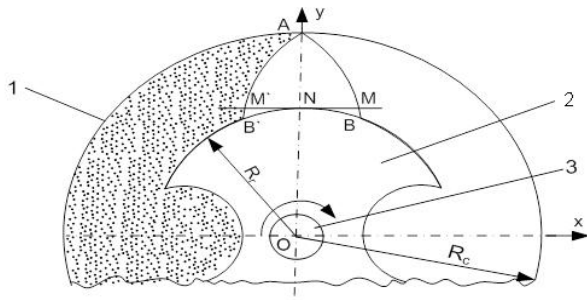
Section through a rotor with a curvilinear piston: 1 – upper casing; 2 – upper rotor; 3 – shaft.
